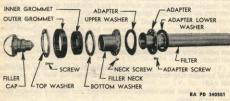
Filler Cap. Filler Neck, Filter, and Attaching Parts
